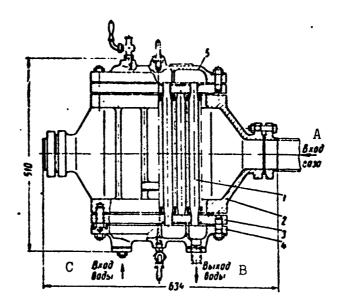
Cooler of first and second stages: 1) ribbed pipe; 2) shell; 3) pipe grid; 4) lower cap; 5) upper cap. A) Gas inlet; B) water outlet; C) water inlet.
